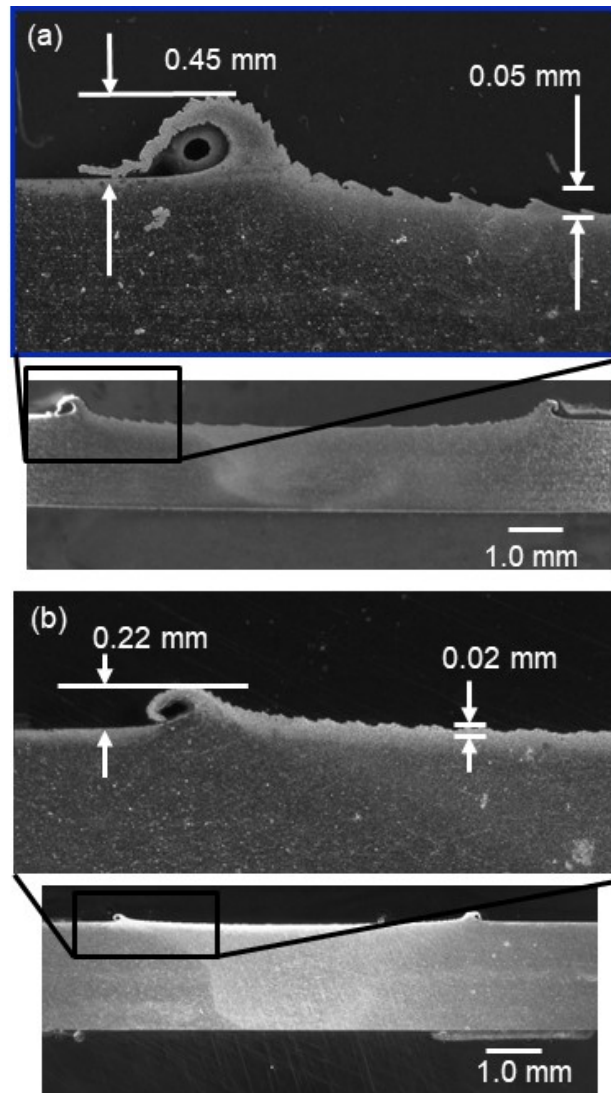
Morphology of friction stir welding (a) Weld A, (b) Weld B
